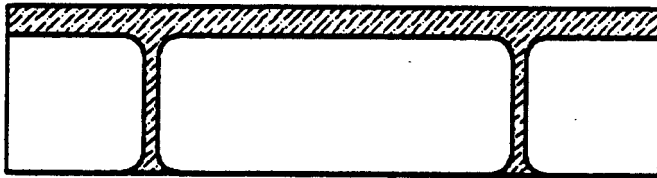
Subpanel cross-section with an integral rib and face structure.
